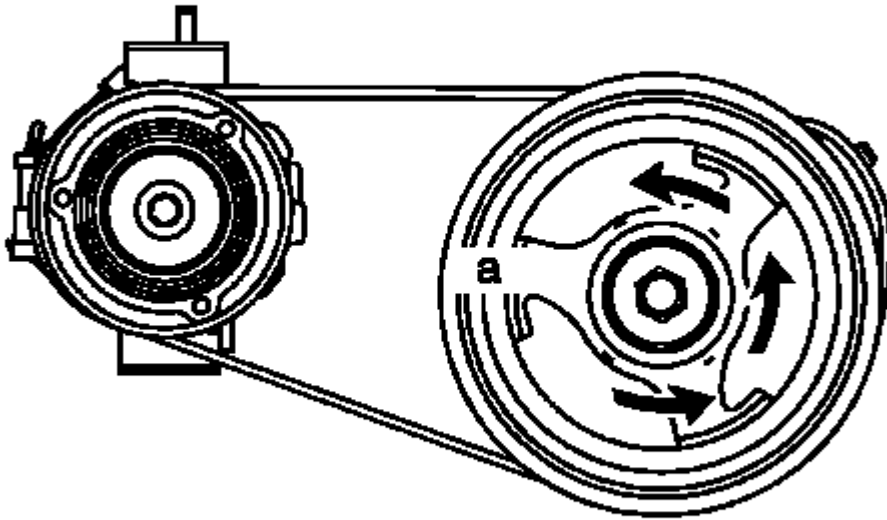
Identifying Position Belt Behind Rear Face Of Balancer & Around A/C Pulley
